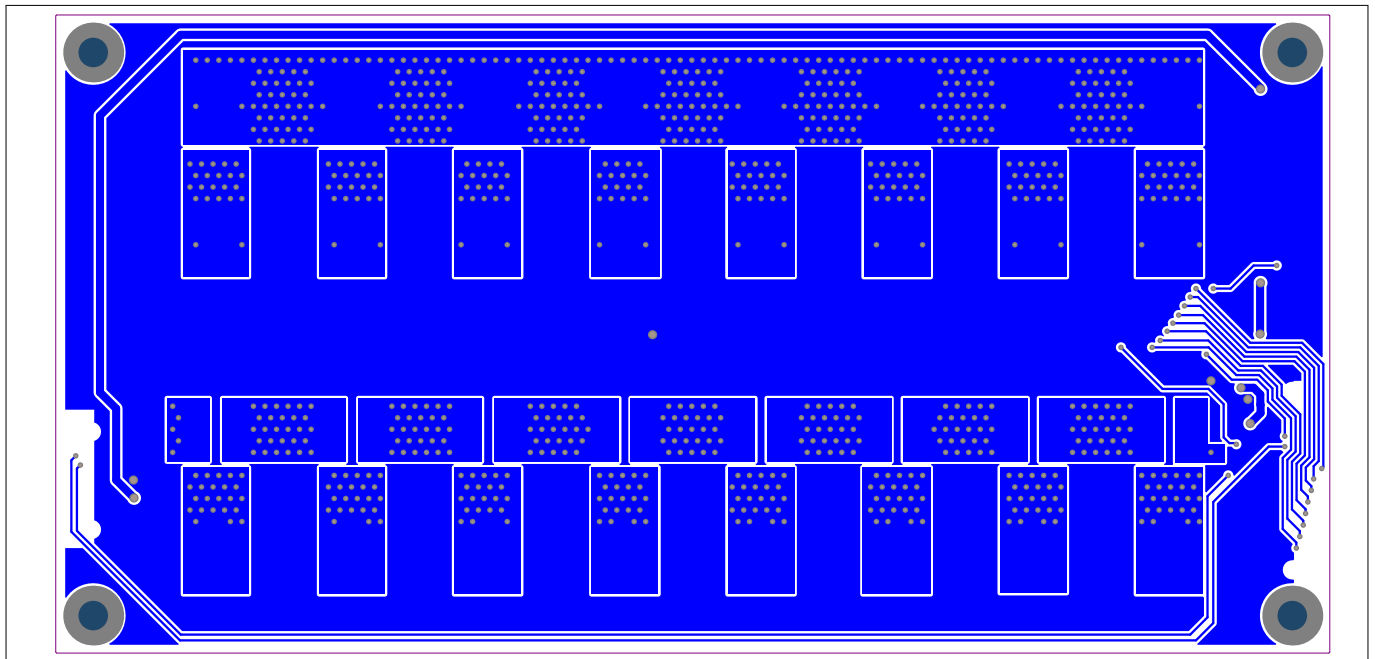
TLD7002-16EVAL Load Tail Light layout bottom view
